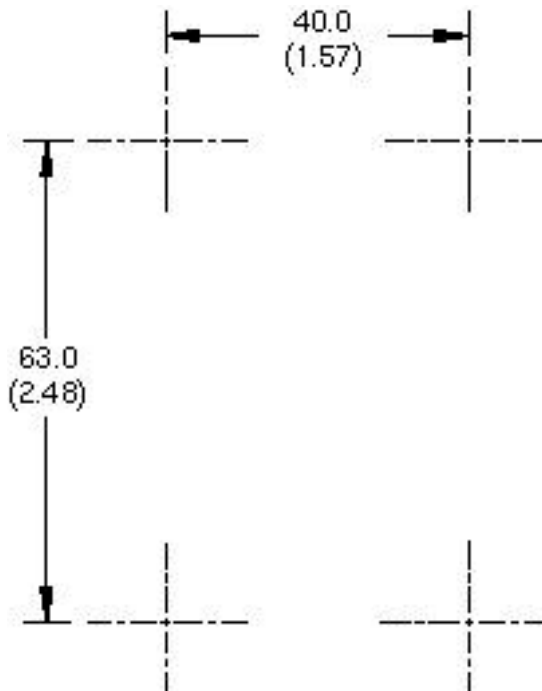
Mounting Hole Pattern Dimensions for Type 2D Base Plates
